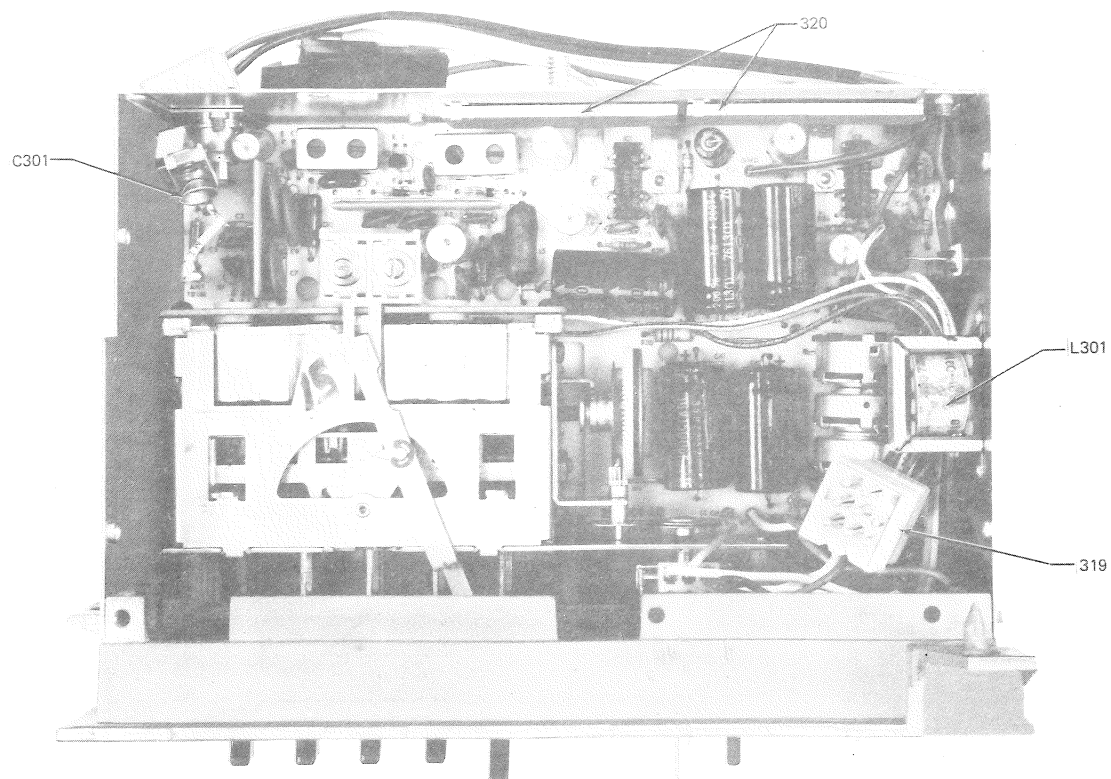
PARTS LOCATION, BOTTOM VIEW (3501457)
